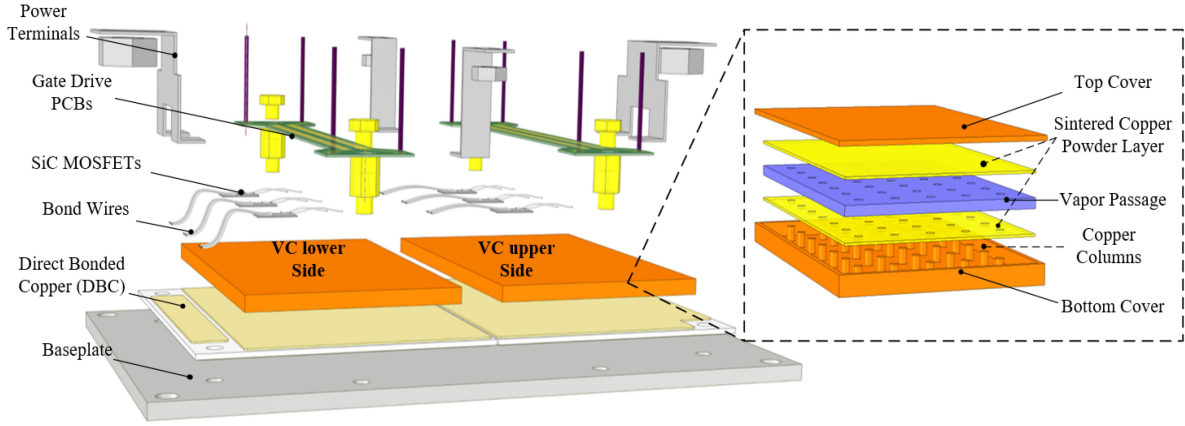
Exploded view of a half-bridge module integrated with VC-PCHSs under SiC dies.
